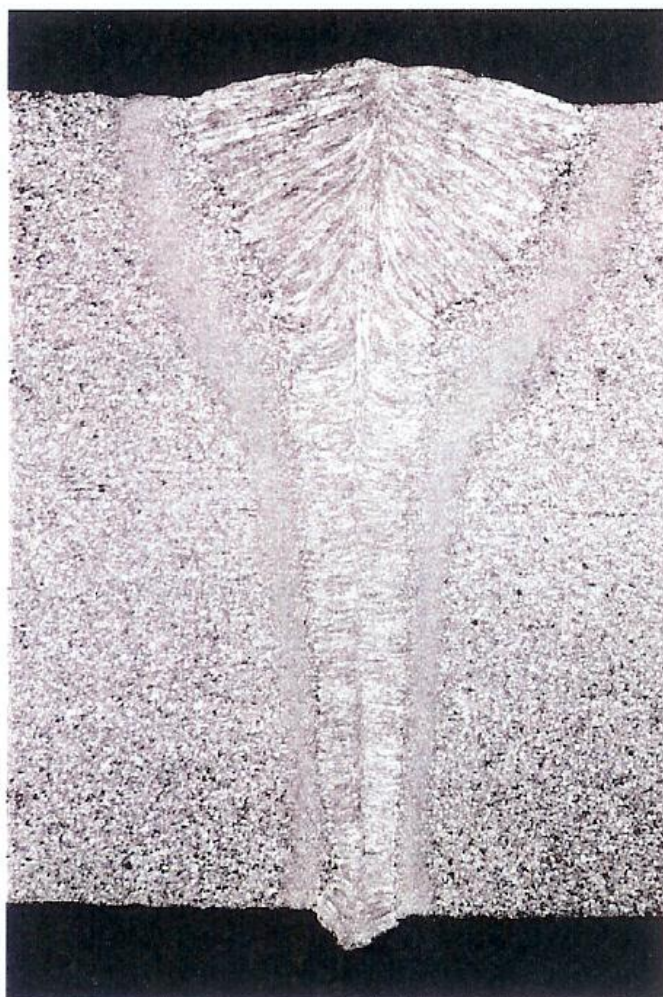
Hybrid welding of mild steel S355NL, 15 mm thickness (single-pass), edge preparation 6° single-V groove: CO₂ laser 15.5 kW, MIG impulse arc leading, filler wire G3Si1, diameter 1.2 mm, assist gas: argon-helium mixture, welding speed: 1.2 m/min.
